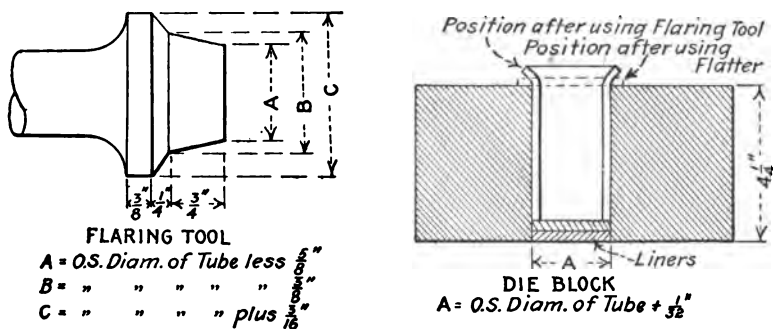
DETAILS OF FLARING TOOL AND DIE BLOCK REQUIRED FOR MAKING FLANGE TESTS OF BOILER TUBES
